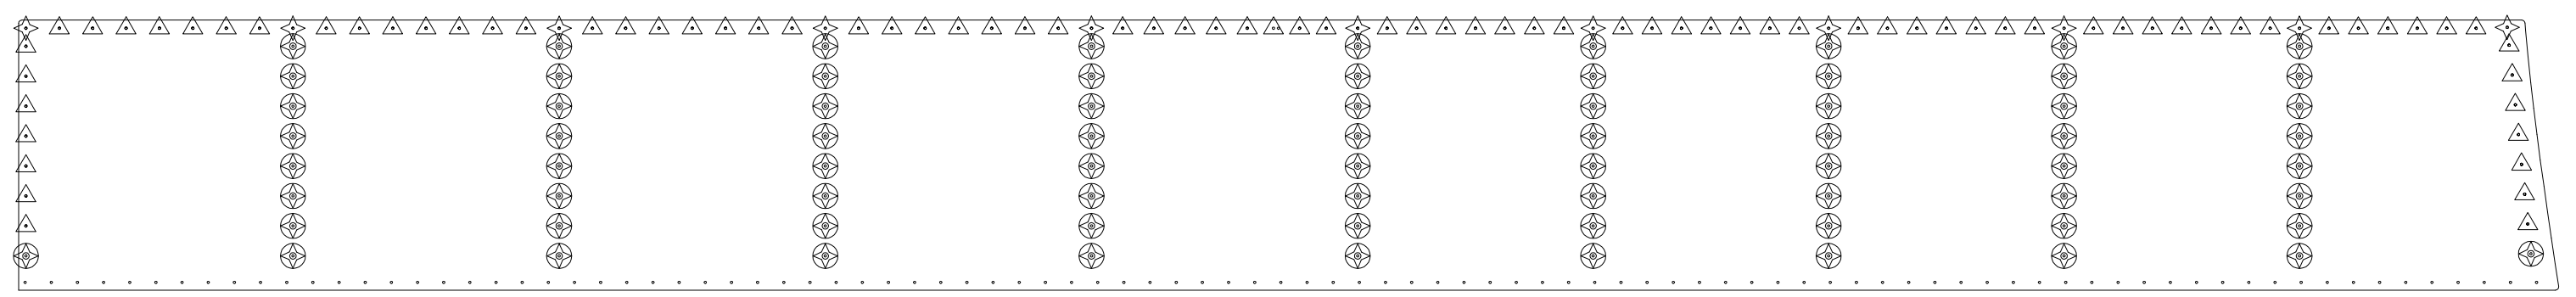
FL-1002 BOTTOM SKIN RIVETS
